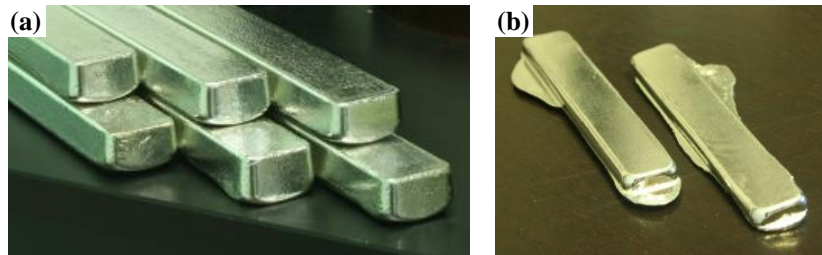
Solder in its various forms – (a) Solder bars (b) Cast ingots
